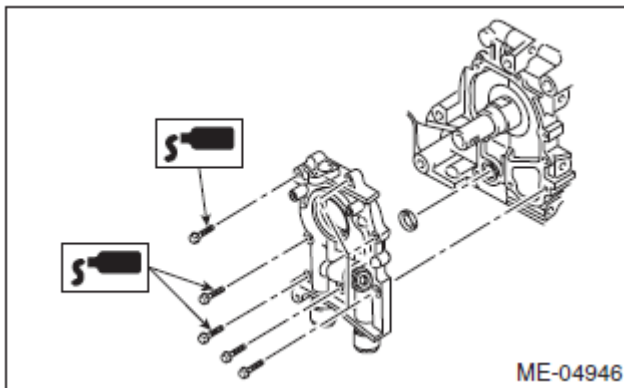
Applying Liquid Gasket To Three Bolts Thread
